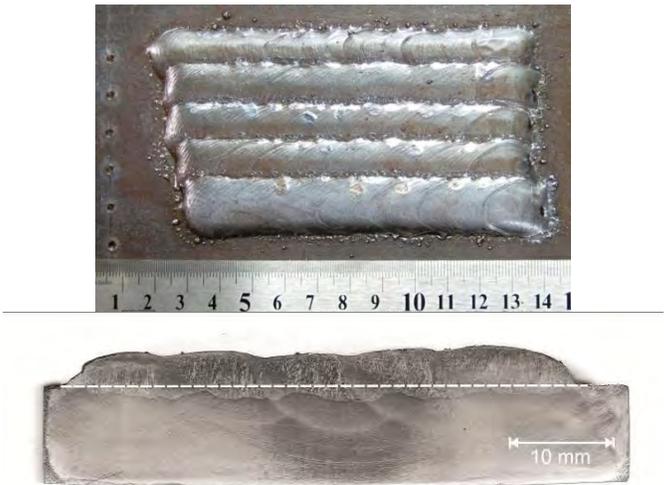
MIG/MAG O-PS produced weld coating.
